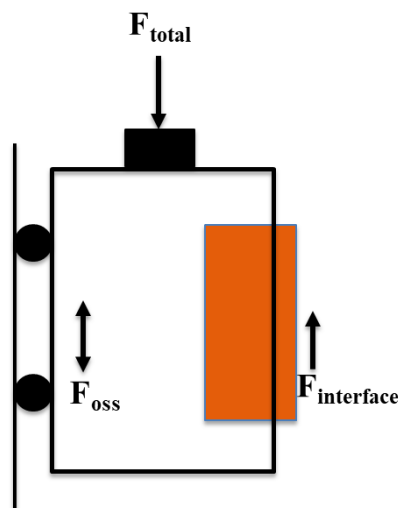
Schematic of Linear Friction Welding.
